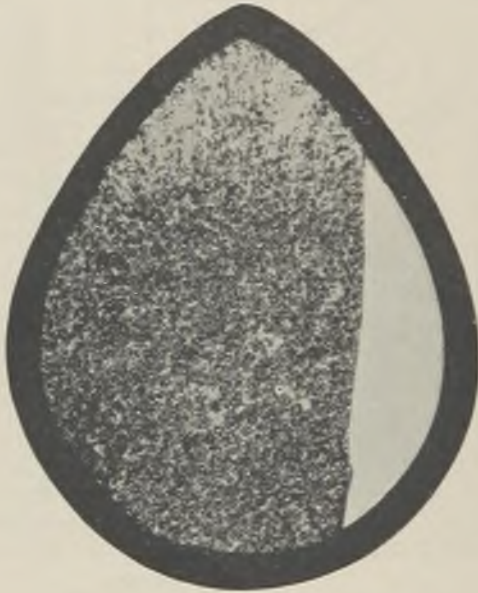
FRACTURE OF FORD V-8 CAST CAMSHAFT. (BY COURTESY OF FORD MOTOR COMPANY.)
